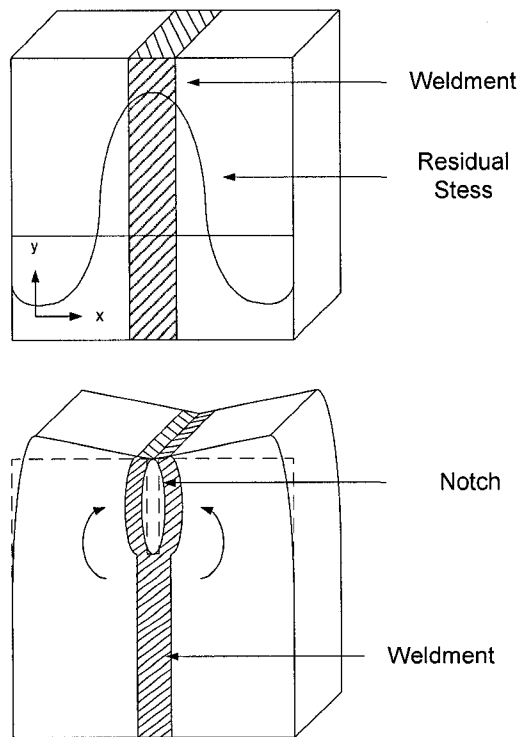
Illustration of crack closure produced in a compact tension specimen by longitudinal residual welding stresses
